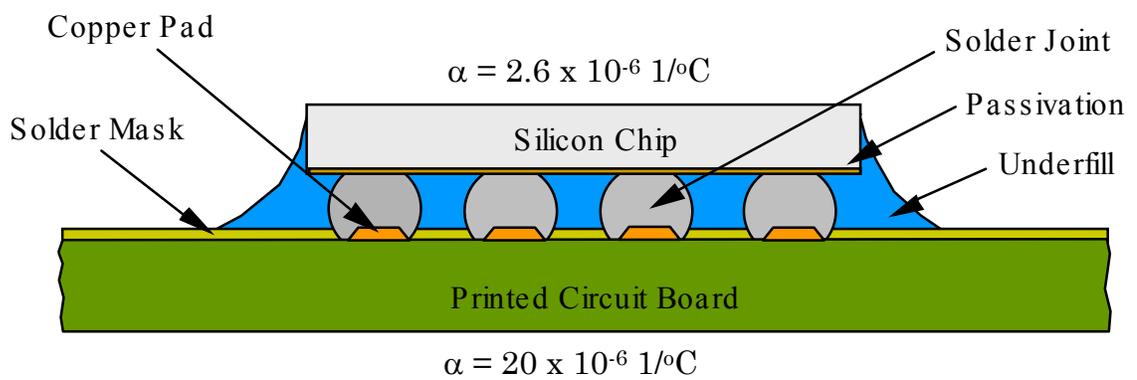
Chip on Board Assembly (Flip Chip)
